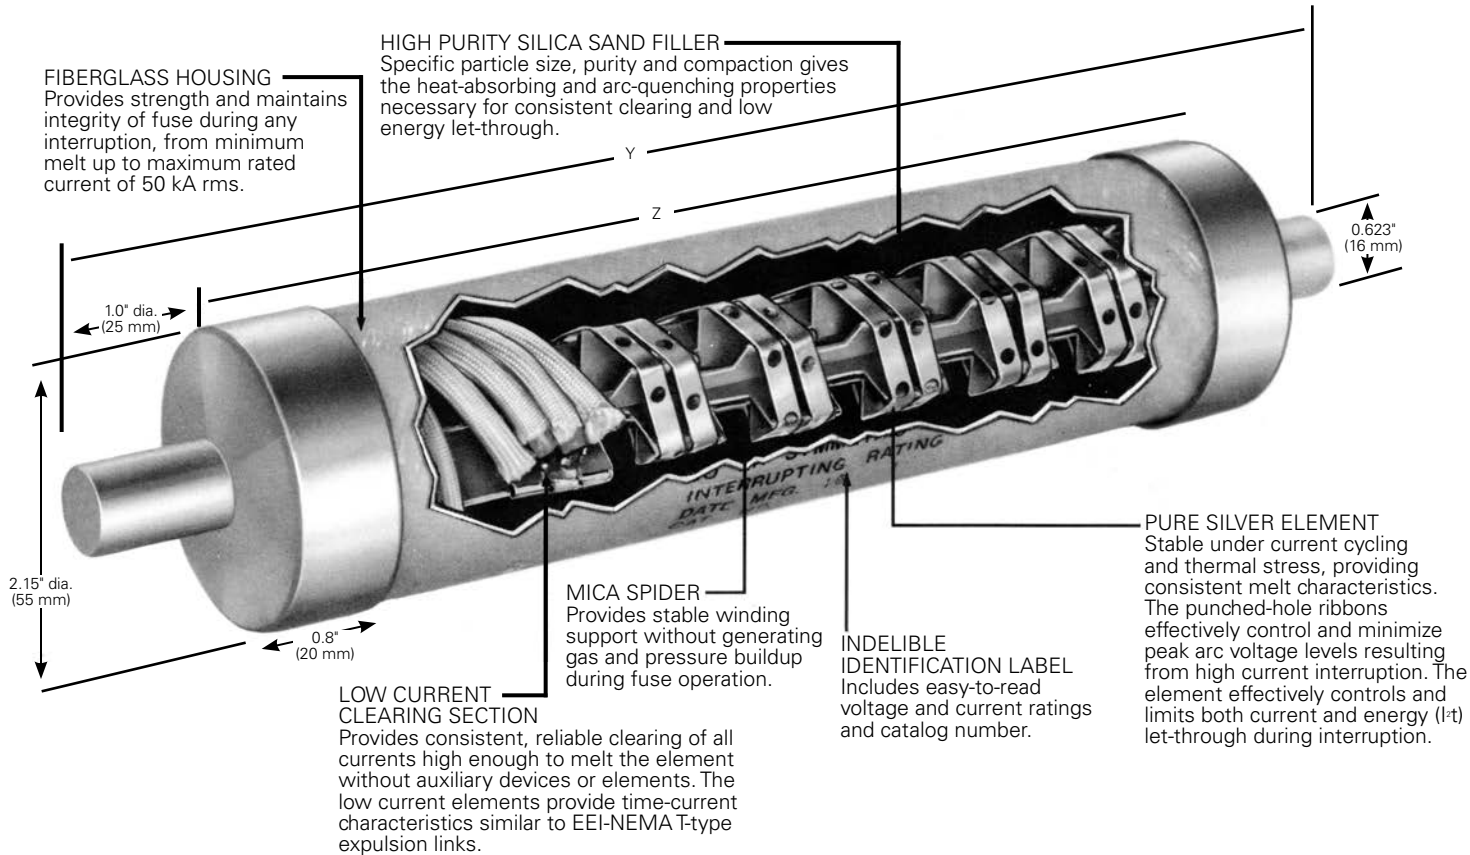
ELX full-range current-limiting fuse cutaway shows detail and dimensions. This fuses’s dimensions allow mounting in industry-standard clip-style and drywell canister mountings.
